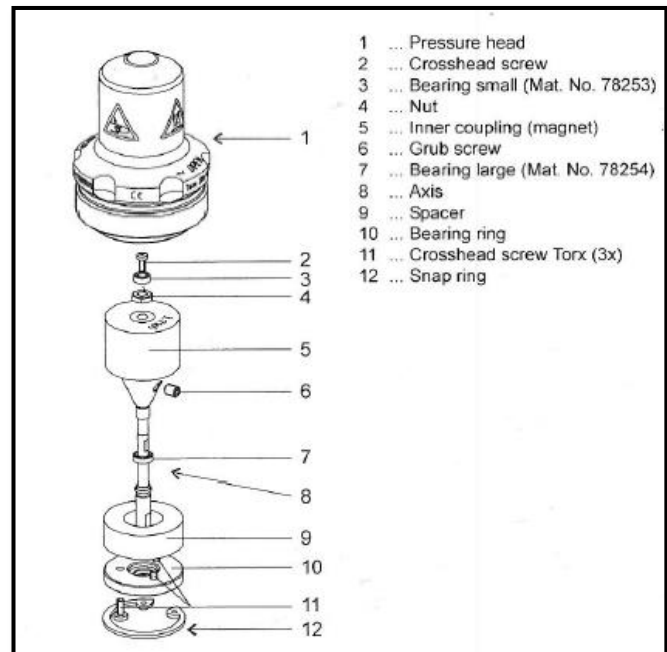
Overview and assembly of pressure head parts (Paar 2007).
